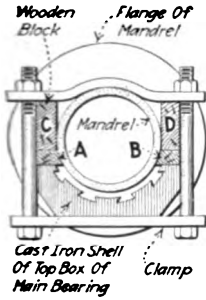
Main-bearing box clamped to babbitting mandrel.
